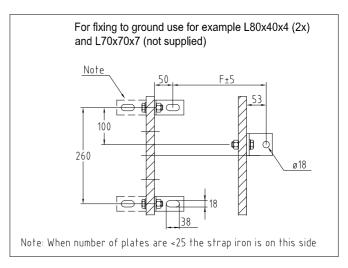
PLATE HEAT EXCHANGER GC-16PI DIMENSIONS, MM
